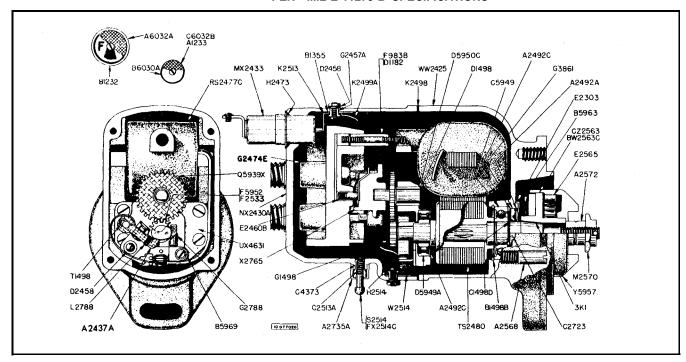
DRIVE GEAR MARKING AND ASSEMBLY
